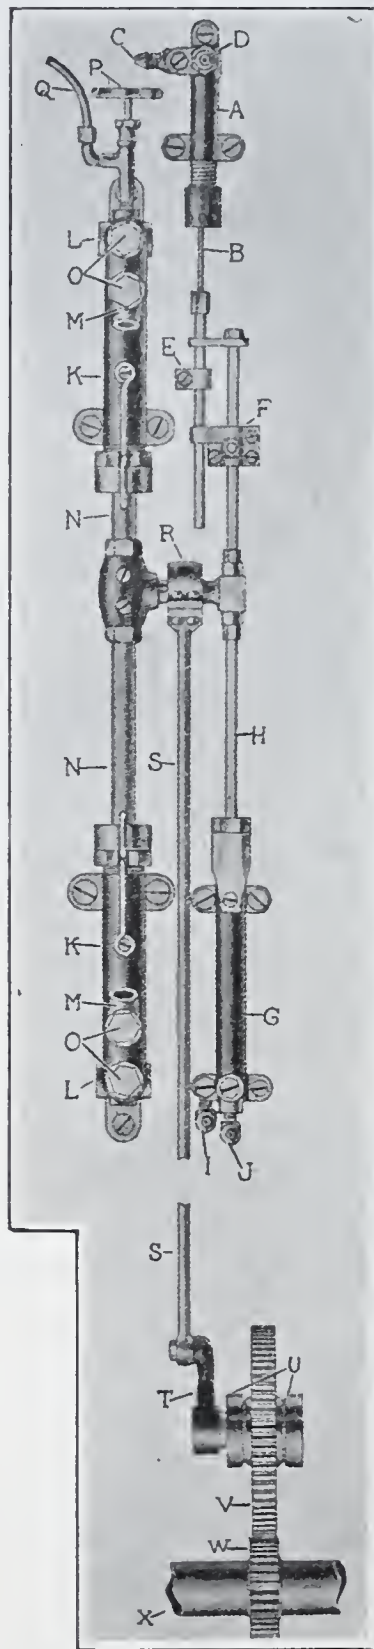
Stanley Fuel, Oil, and Water Pump Assembly.
